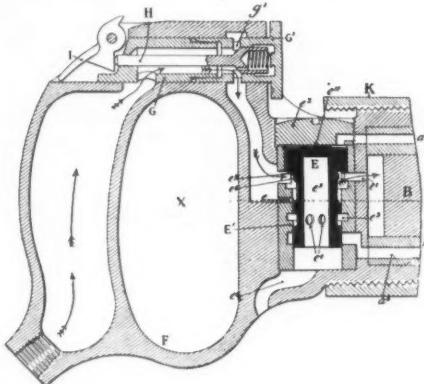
"LITTLE GIANT" HAMMER. READY TO STRIKE, PISTON AND VALVE IN EXTREME POSITION.
